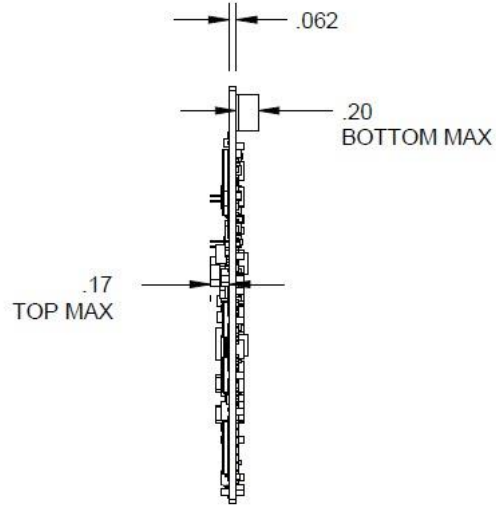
Board Without Cooling Plate (ESR-6300-NCP-K9) Side View
